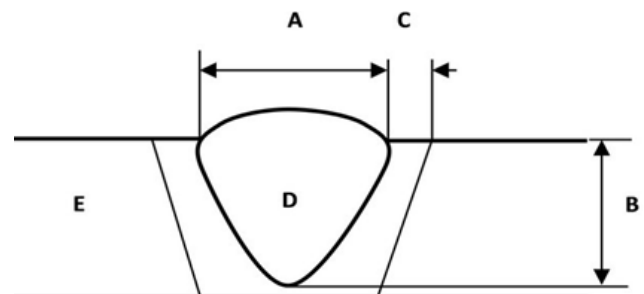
Weld bead shape parameter. A: Bead width, B: Depth of penetration, C: HAZ width, D: Weld metal, E: Base metal
